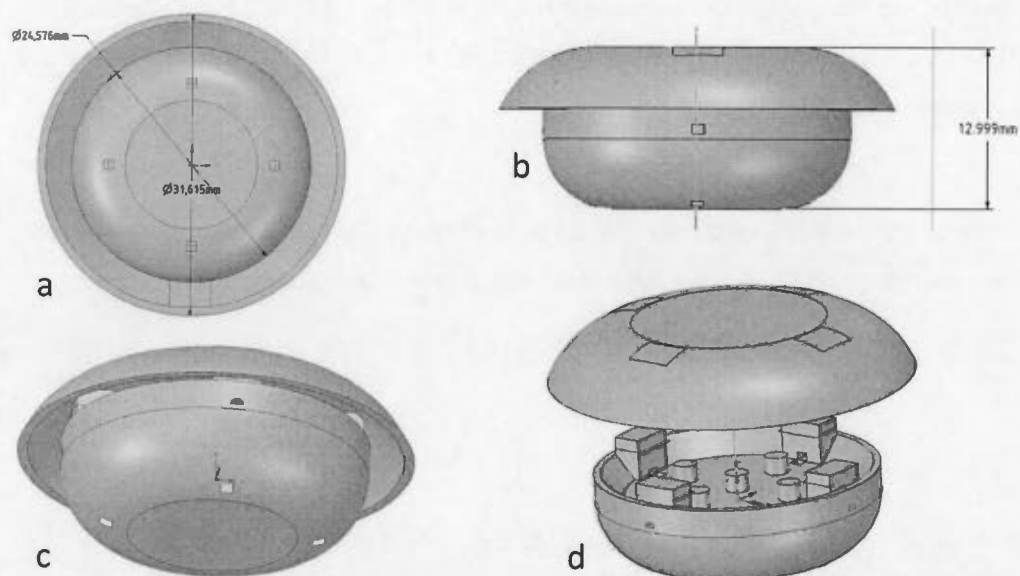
PAS fifth (5-1) concept design bottom part 3D view. (a) Wired view. (b) Shady view
